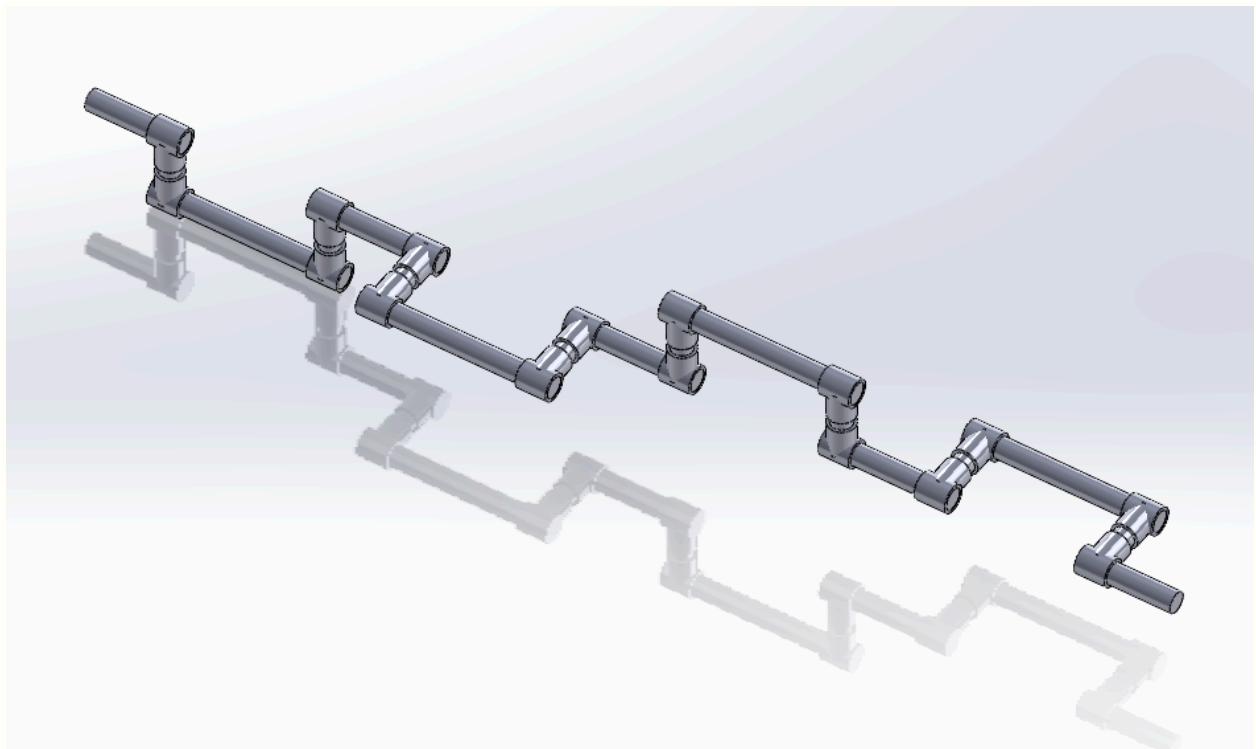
Solidworks Model of Crankshaft (Isometric View)
